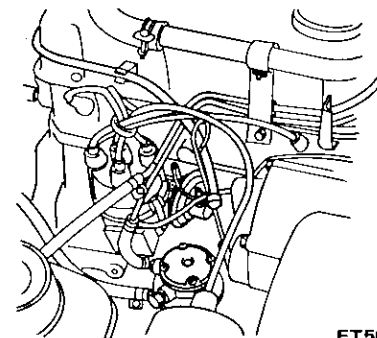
Disconnecting Distributor Vacuum Hose
